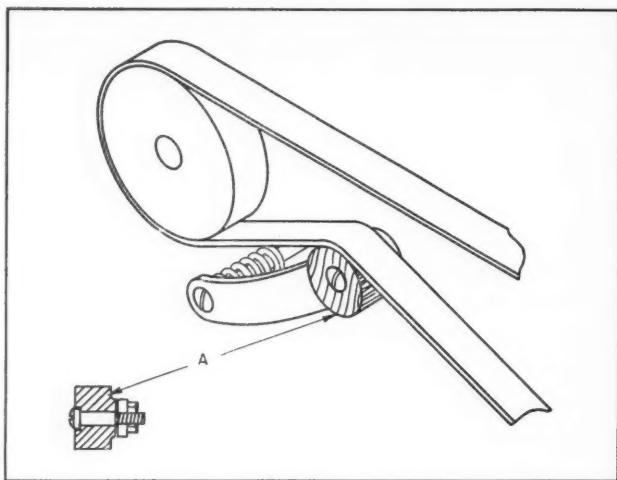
An oilless wood idler pulley (A) is used to maintain proper tension on the driving belt of an office dictating machine, thus minimizing wear and noise by lubricating the shaft about which it rotates
